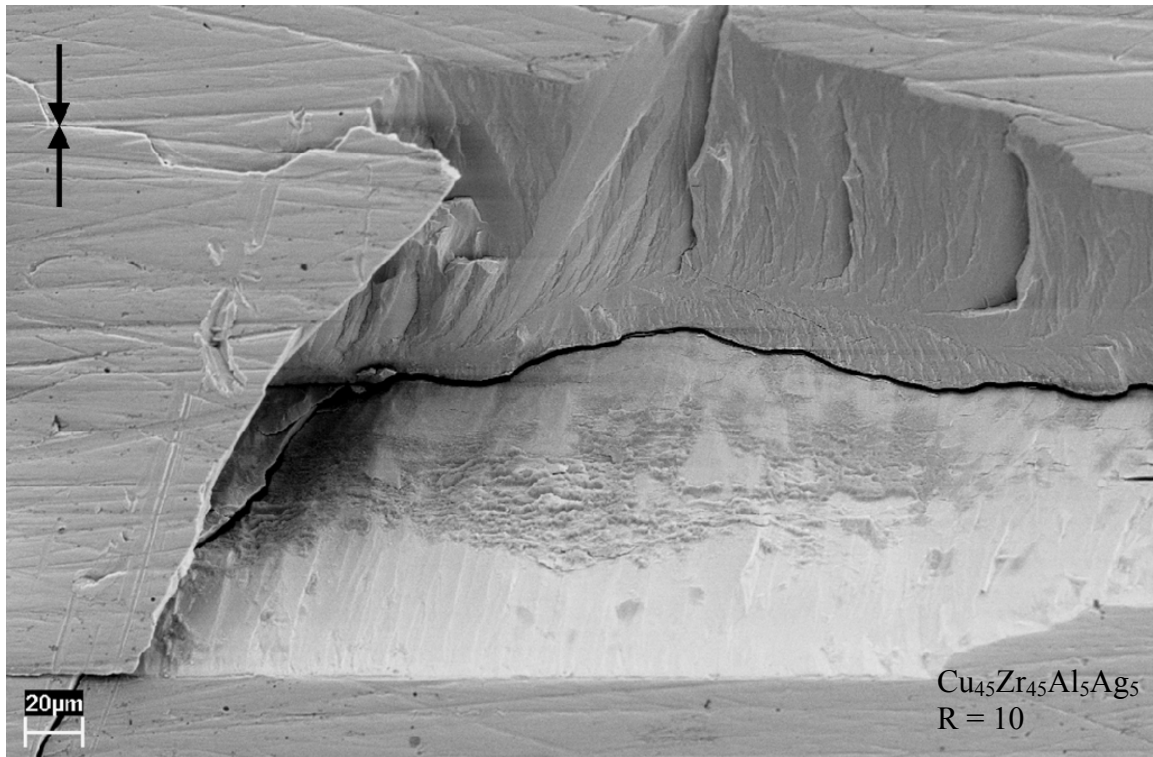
Fracture surfaces of a chipped region.
